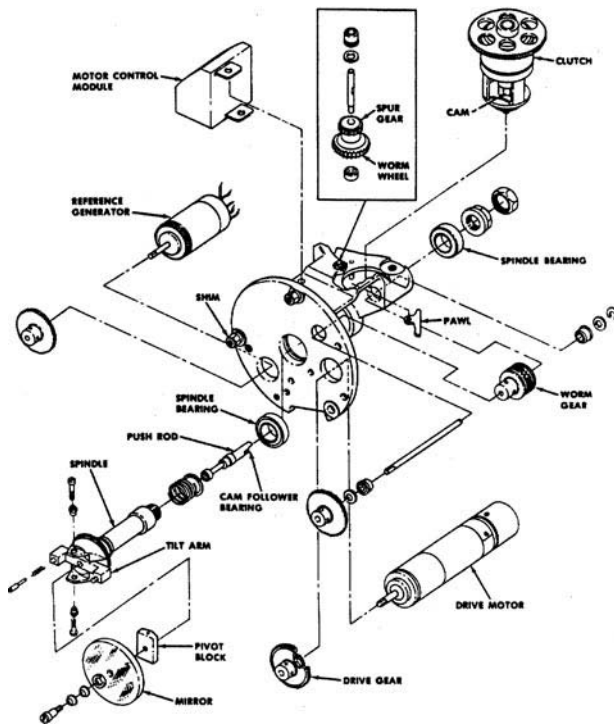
Exploded view of nutator assembly, showing sequence of assembly.
